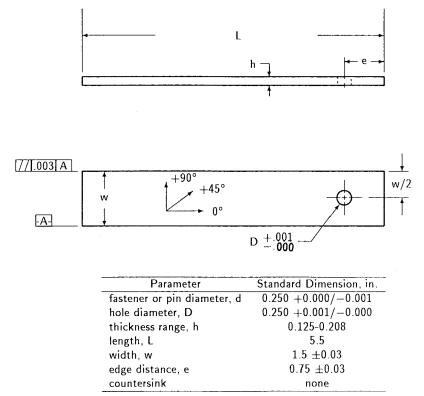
Double-Shear Test Specimen Drawing (inch-pound)
